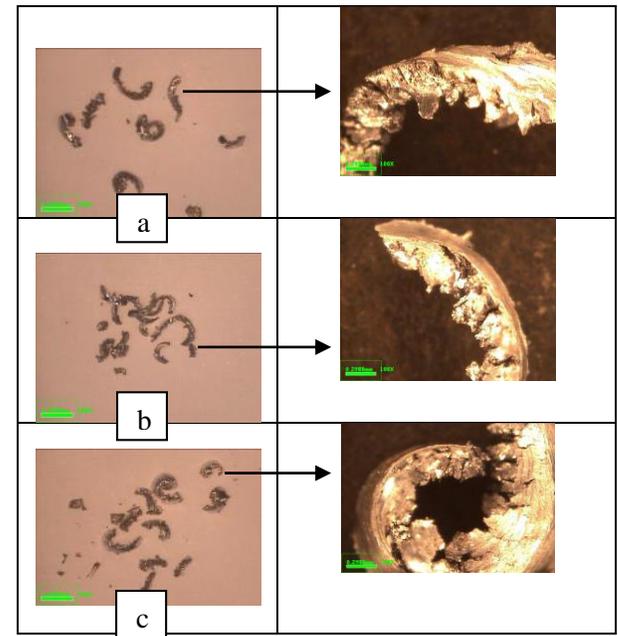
AISi/AlN MMC chips, machined using a coated insert TiB2 at different cutting speeds of (a) 230 m/min, (b) 300 m/min, and (c) 370 m/min
